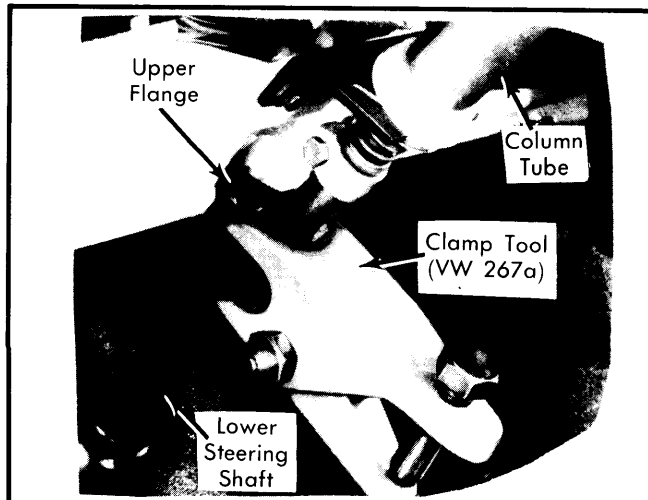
Clamp Tool for Installing Spacer Sleeve
